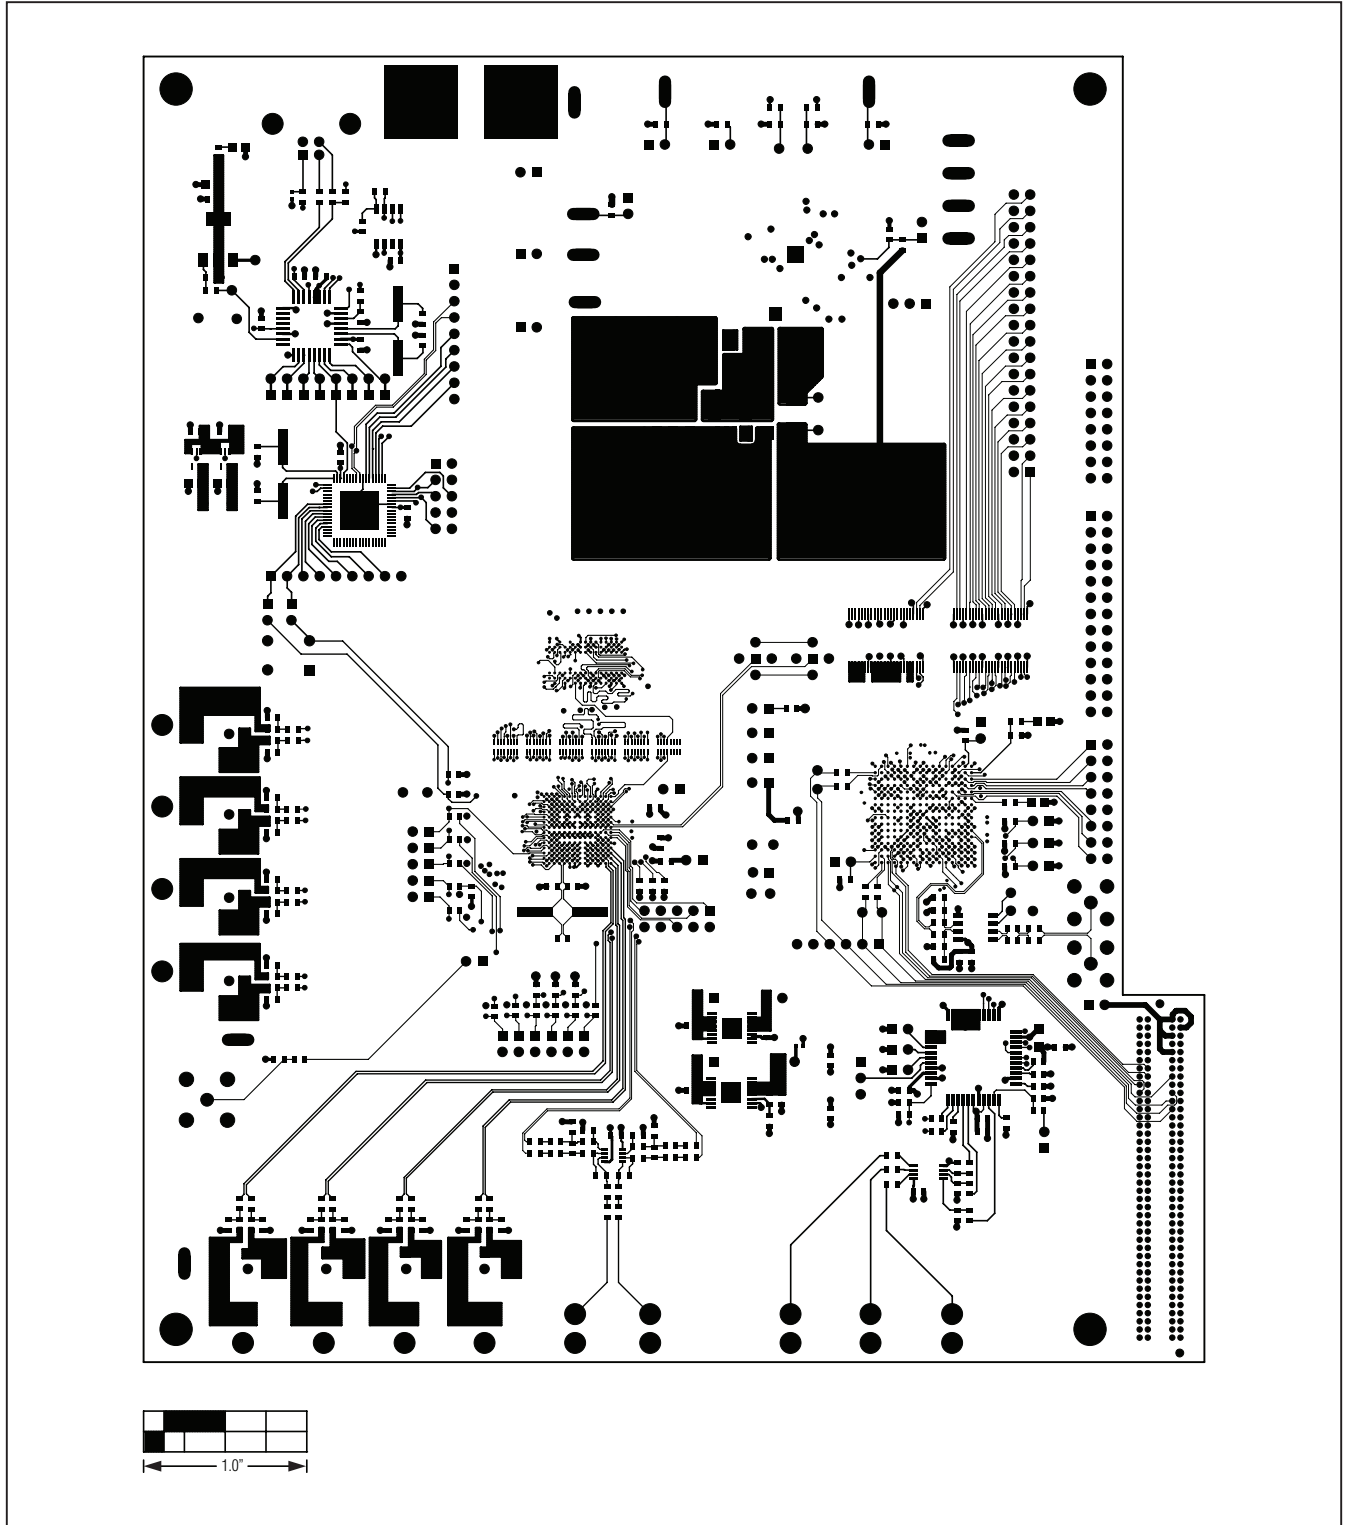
MAX9530 EV Kit PCB Layout—Component Side
